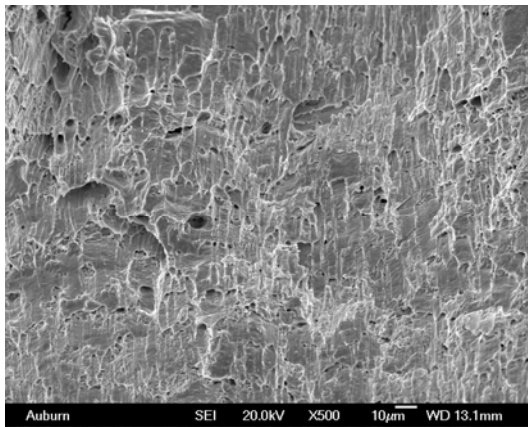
Fracture Surfaces of the Failed Specimens (60-days Aging at R.T.)
